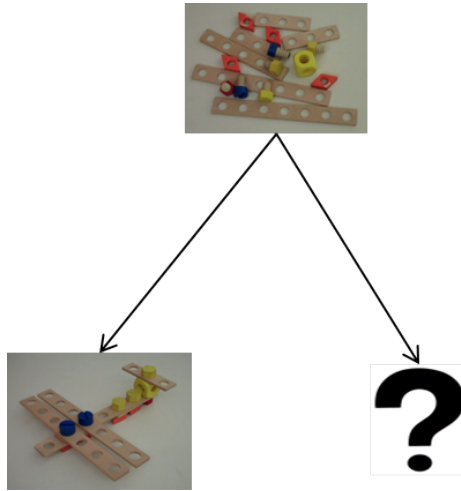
Assembling different model configurations using the parts from the model airplane assembly task.
